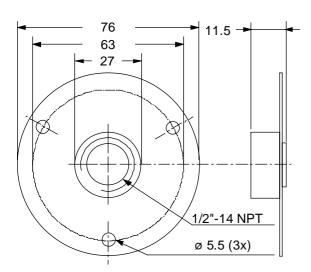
Duct flange to be used with closed-tank connector FTG13A-600R. order number T-752-1001
